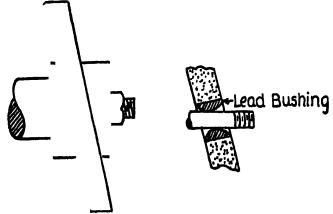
WOBBLE WHEEL FOR SURFACE GRINDING OPERATIONS
